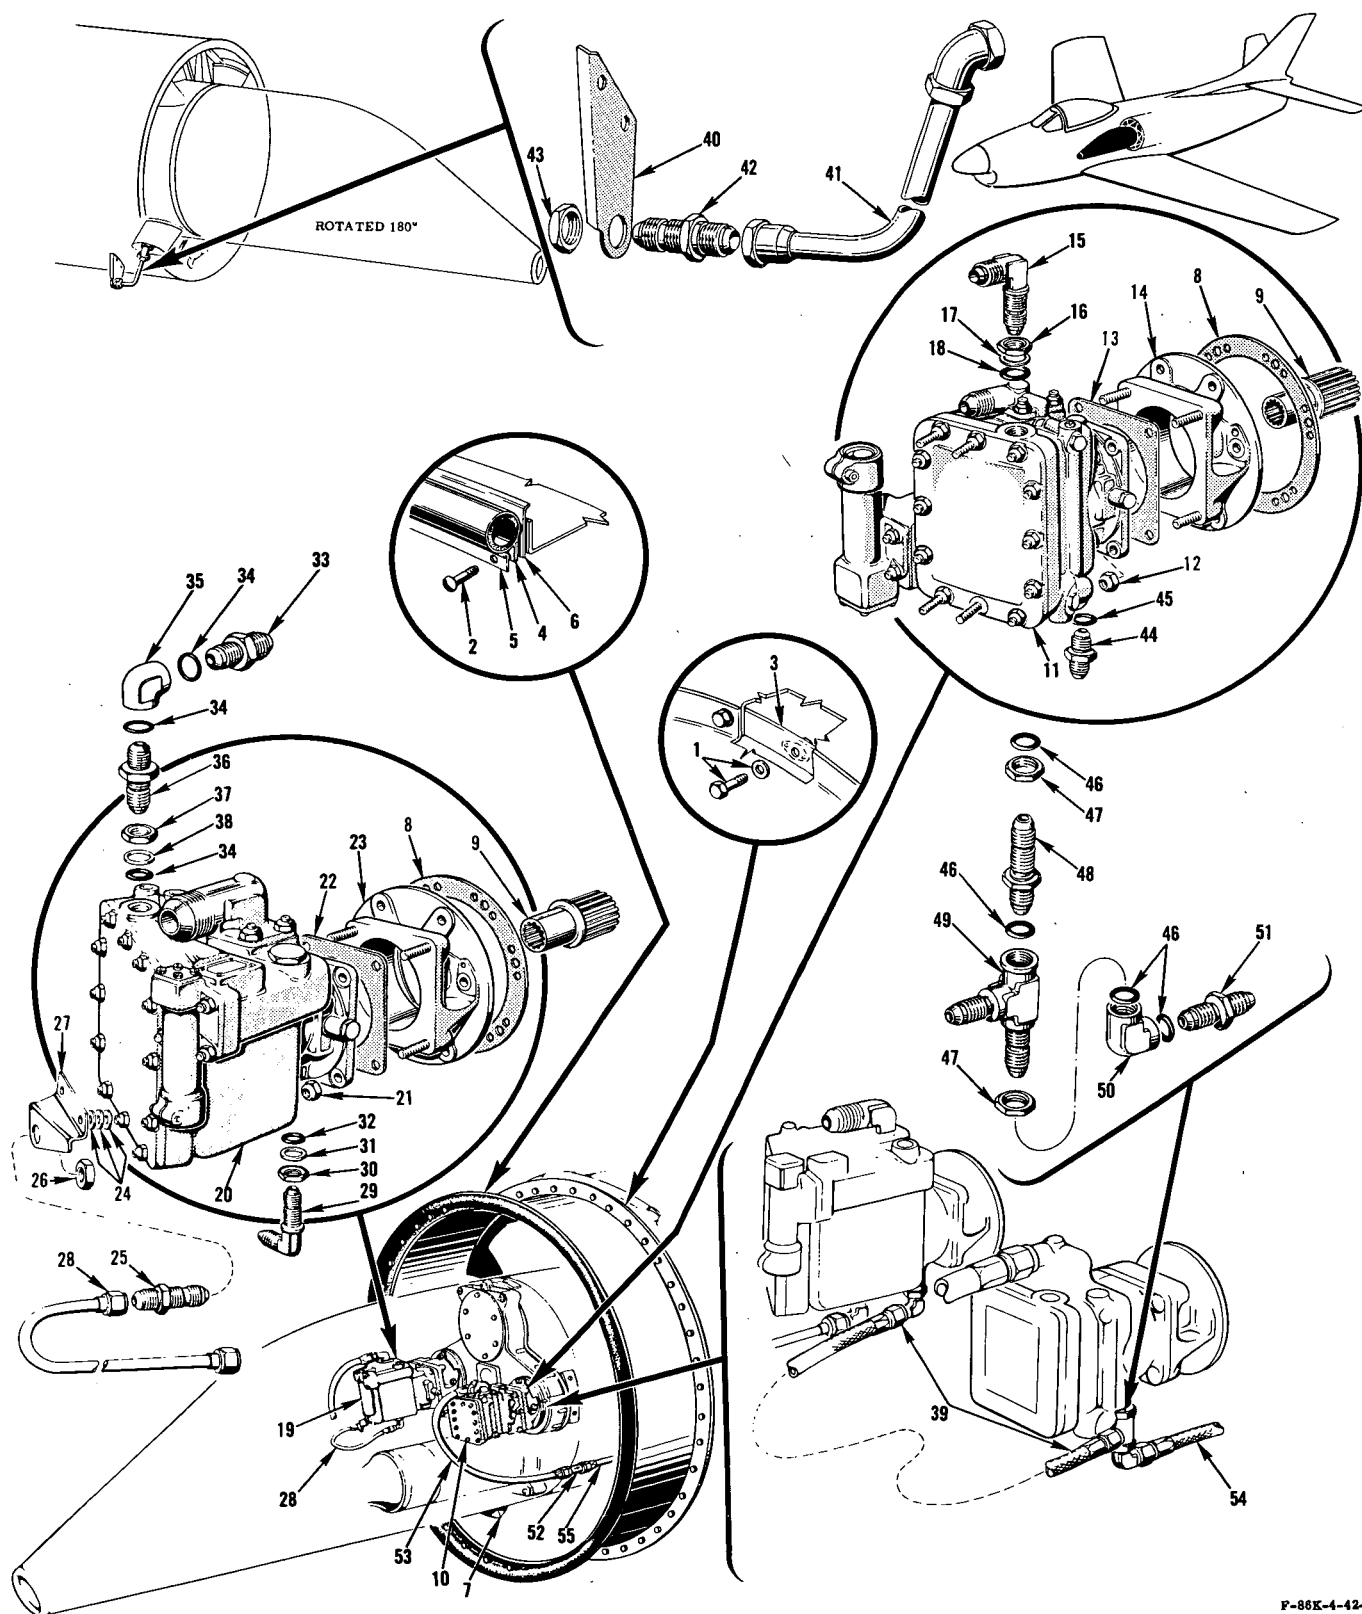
COMPLETE ENGINE AND ACCESSORIES ASSEMBLY
